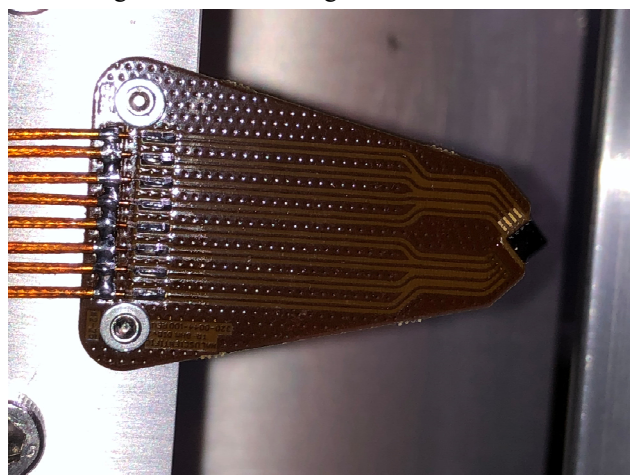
The diamond detector of Fig. 2, mounted on the printed circuit for fan-out to the 8 coaxial cables.
